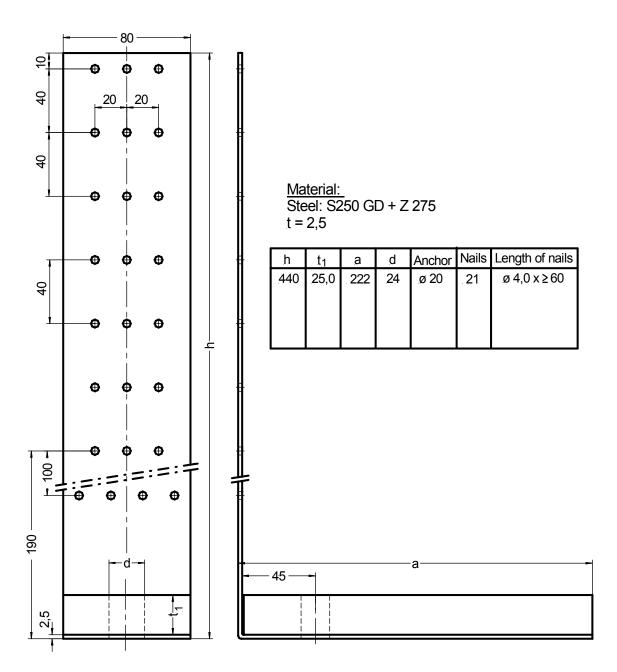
Dimension of one-piece hold-down; width 80 mm
